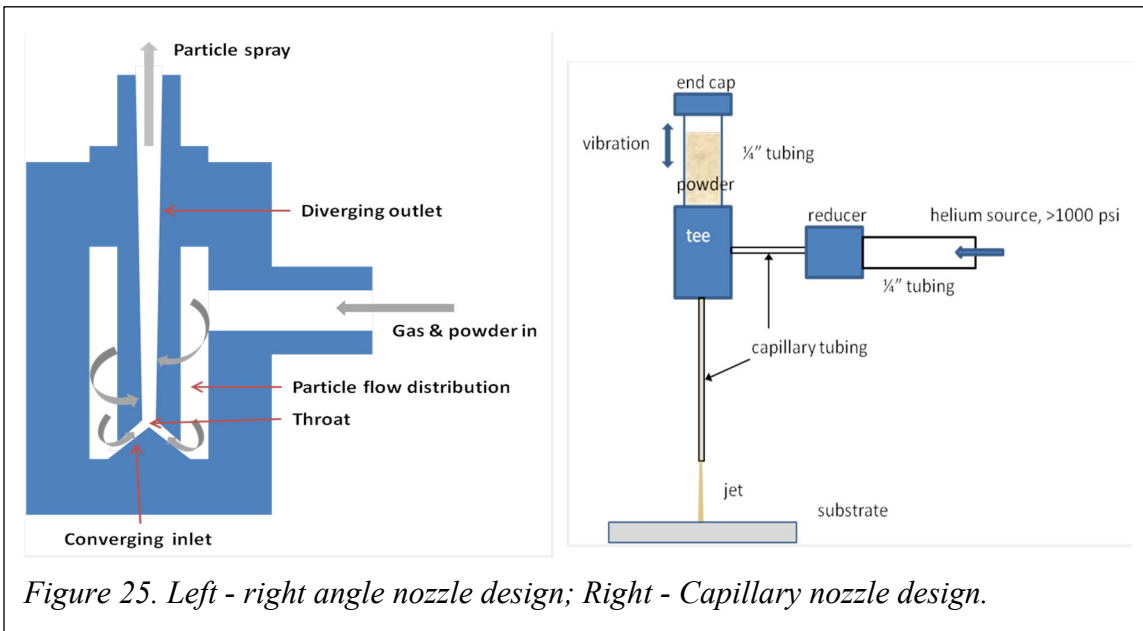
Left - right angle nozzle design; Right - Capillary nozzle design.
